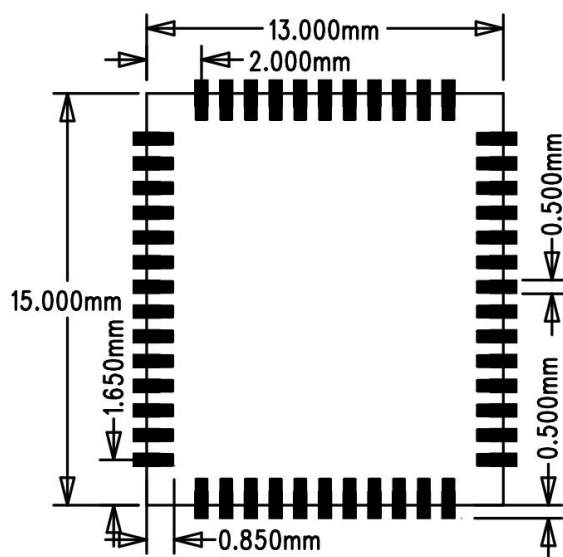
Recommended PCB Footprint of AW65S2-50B1
